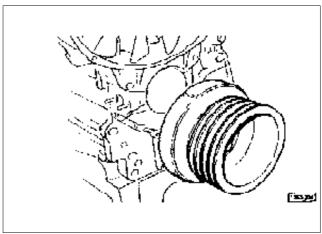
Install the front pulley along with damping flywheel on SILVER 100.6. The hub should be centred onto the shaft. Then tighten the securing screws to the torque specified on page 90. Apply pulley to hub;
